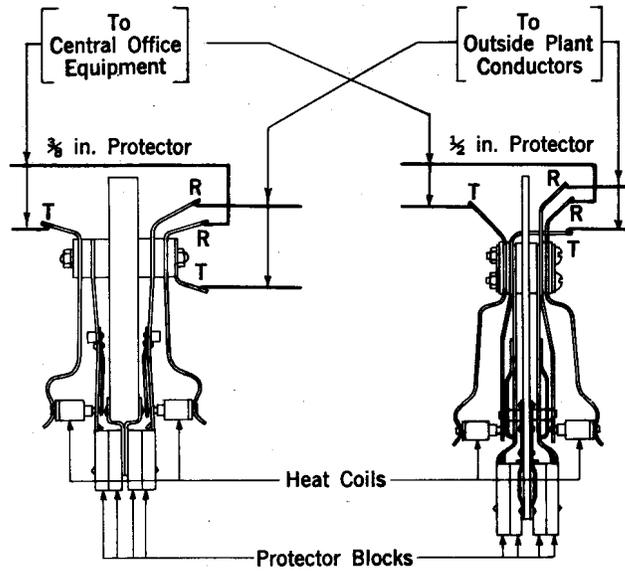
Connections to Protector as Made on A-Type Main Distributing Frame
